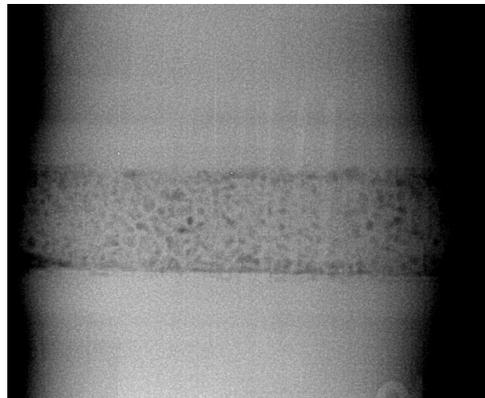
Porosities in 110 mm thick weld (IPS – 4 MeV)
